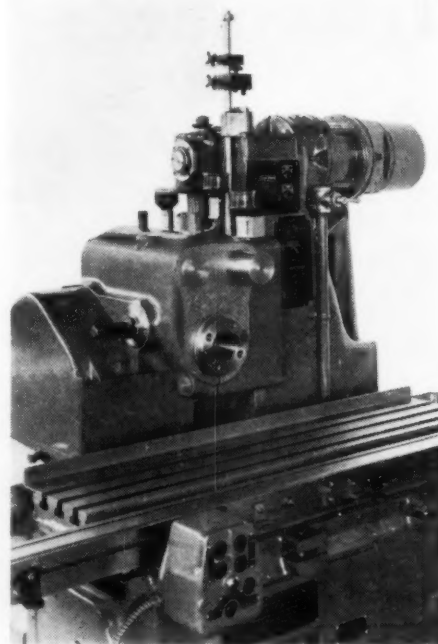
ATTACHMENT FOR AUTOMATIC MOVEMENT OF A MILLING-MACHINE SPINDLE HEAD
